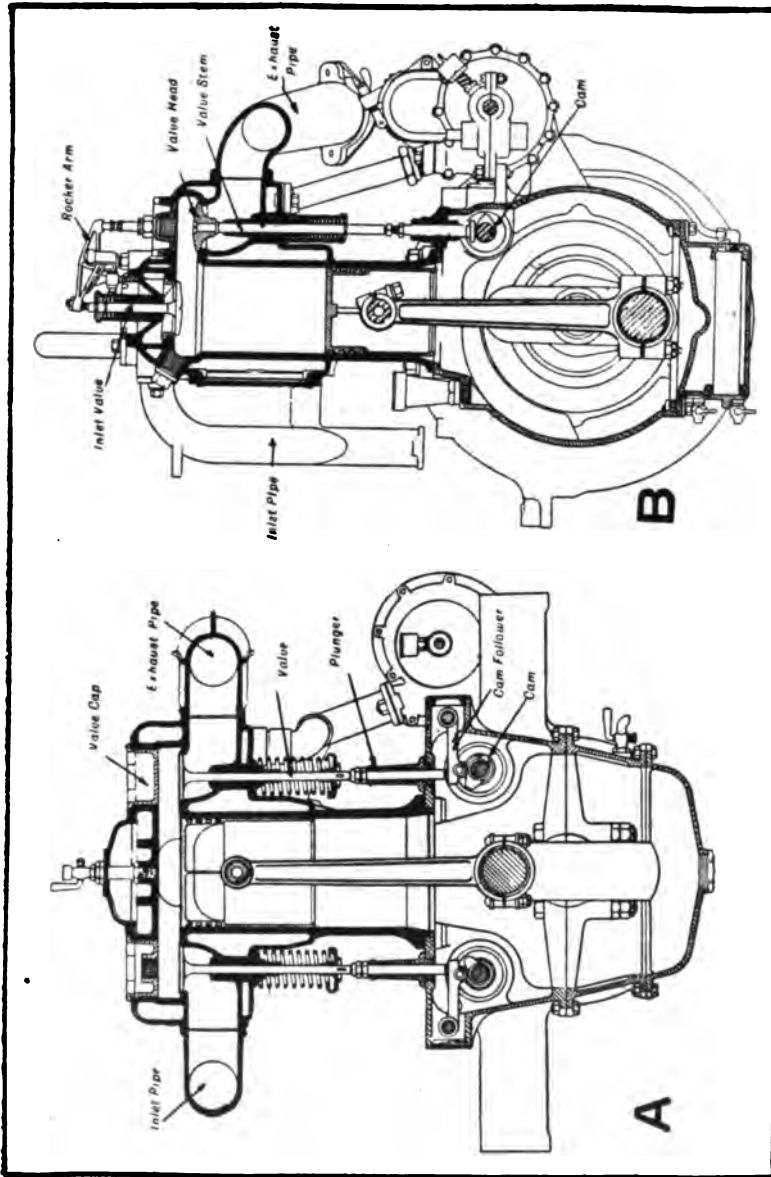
Illustrating typical methods of valve installation in internal combustion motors.
